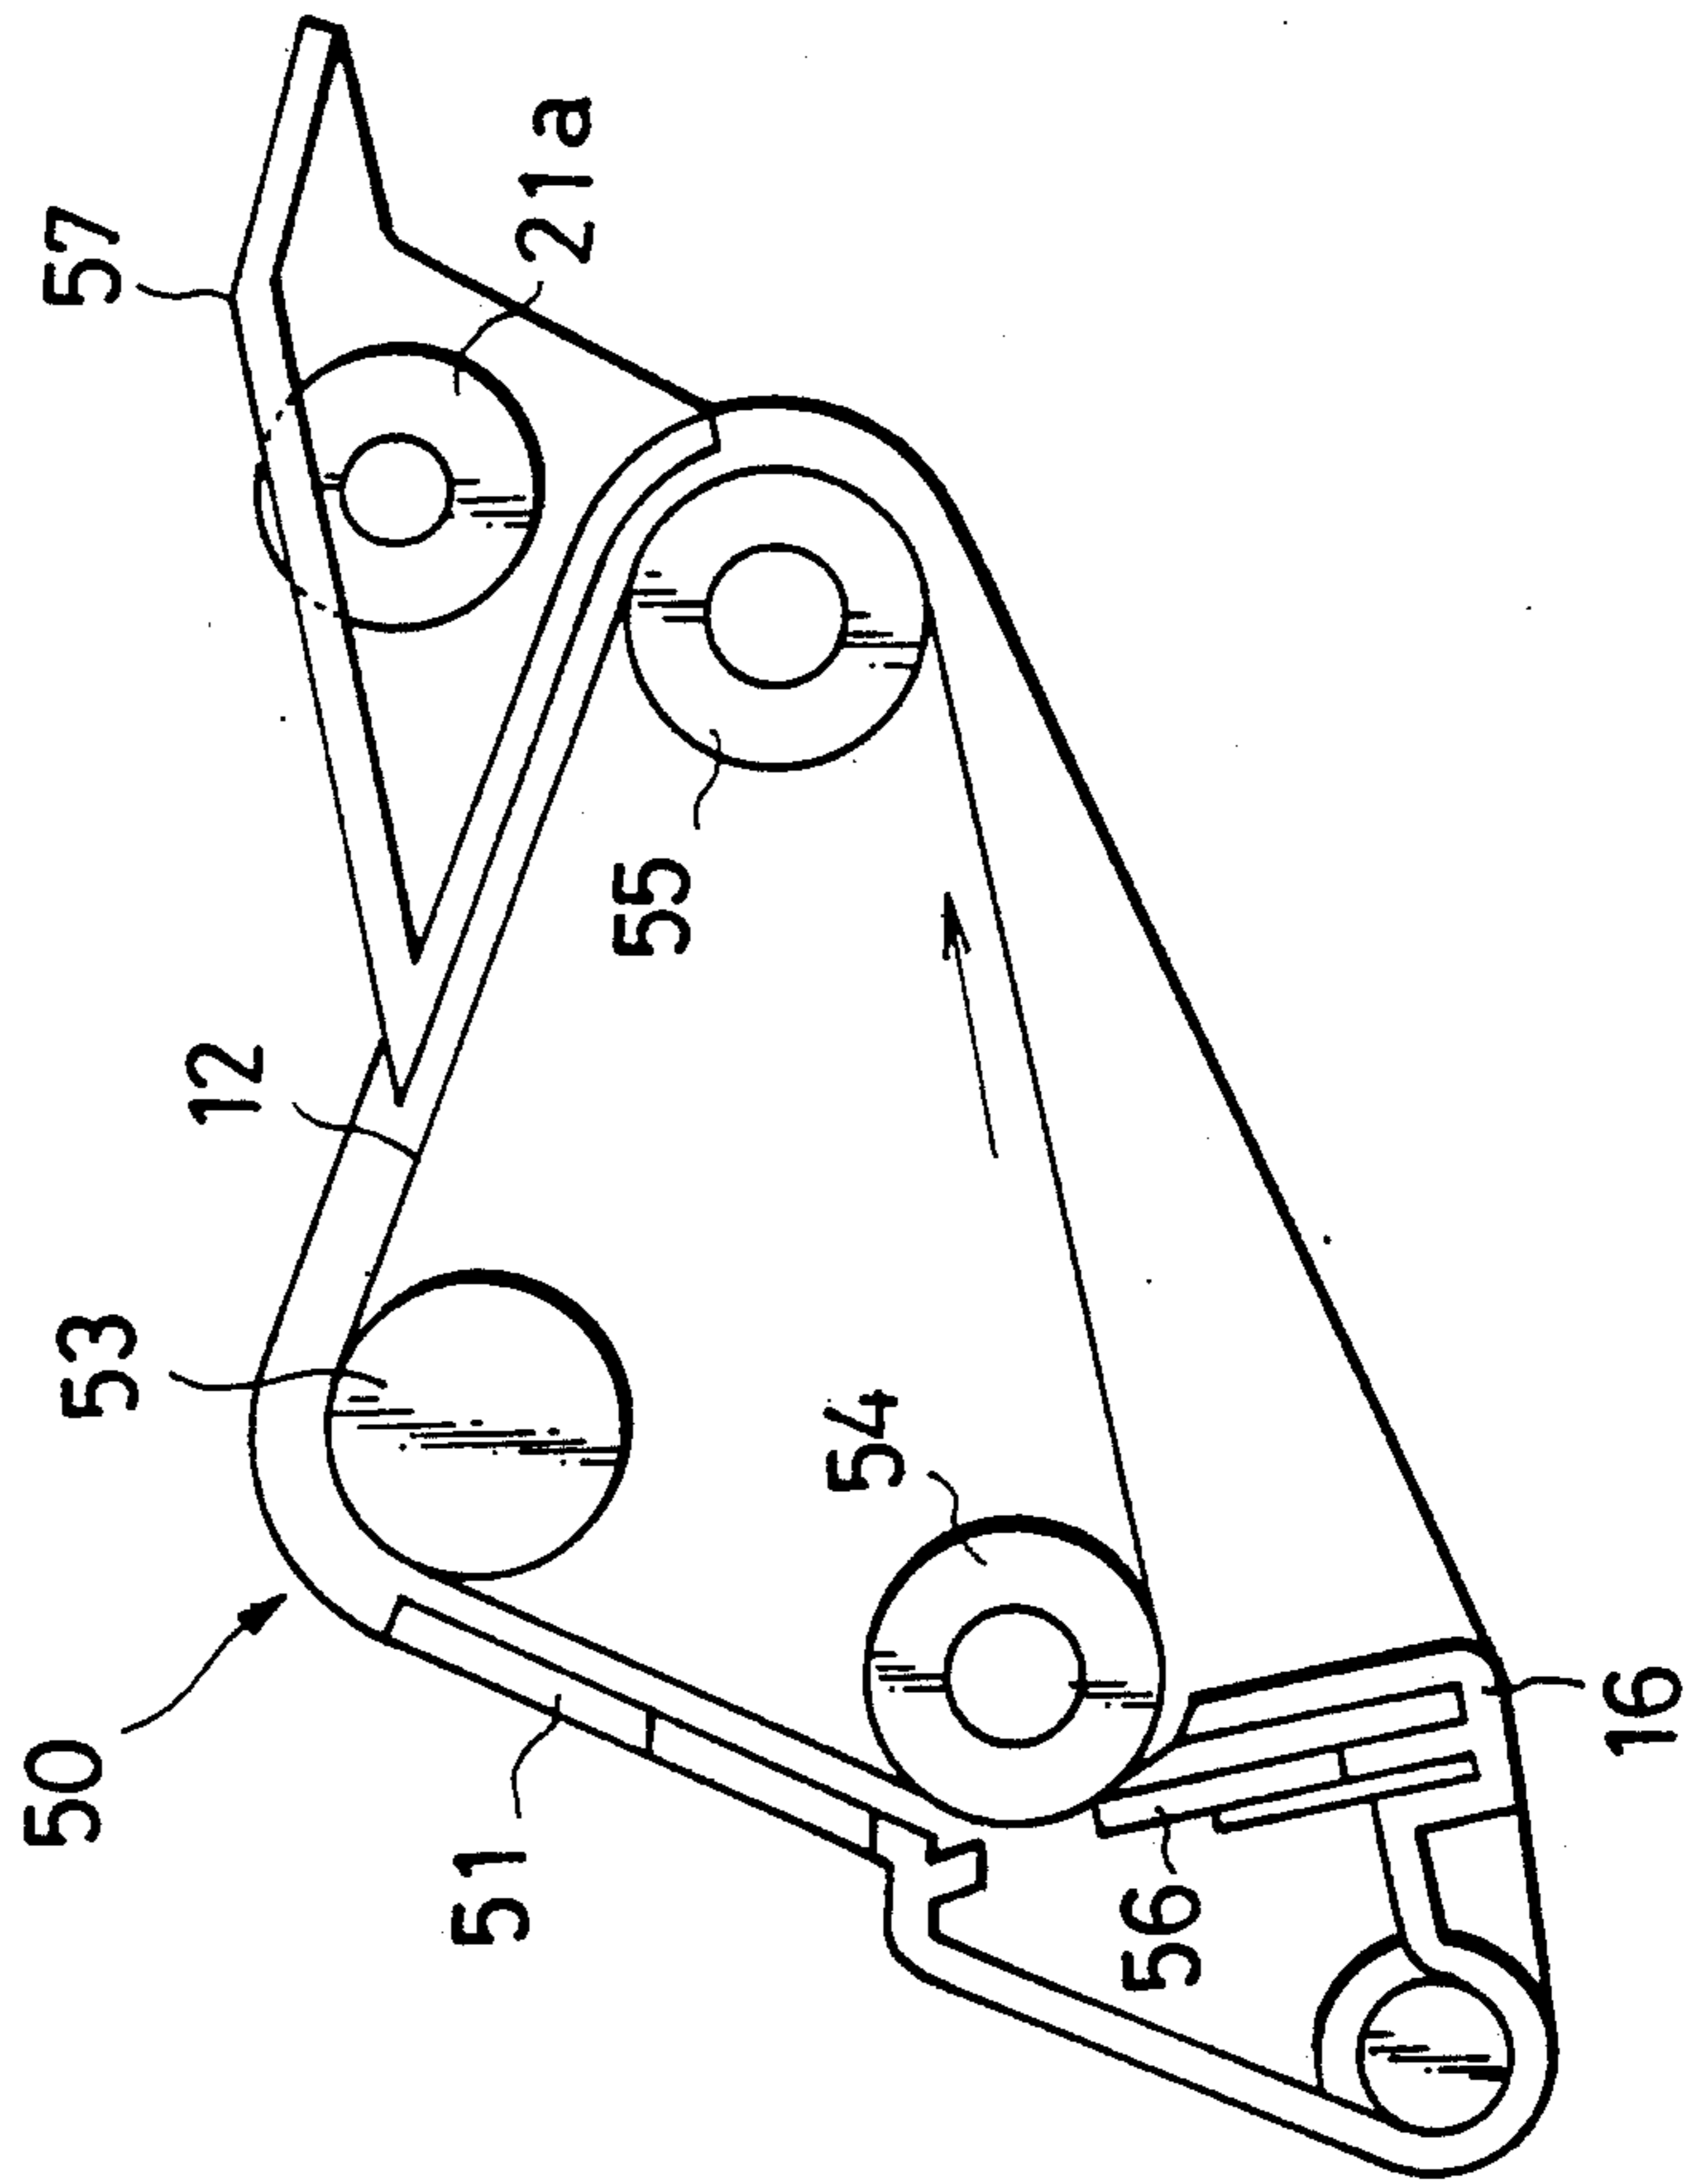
IMAGE FORMING APPARATUS WITH REMOVABLE PROCESS UNIT WHICH SEPARATES THE CONVEYING ROLLERS
